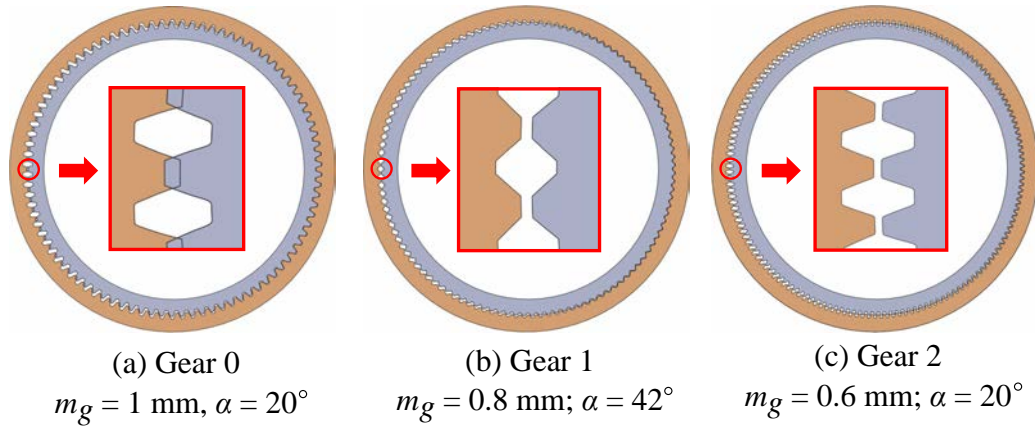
Tooth interference conditions of Gear 0, Gear 1 and Gear 2.
